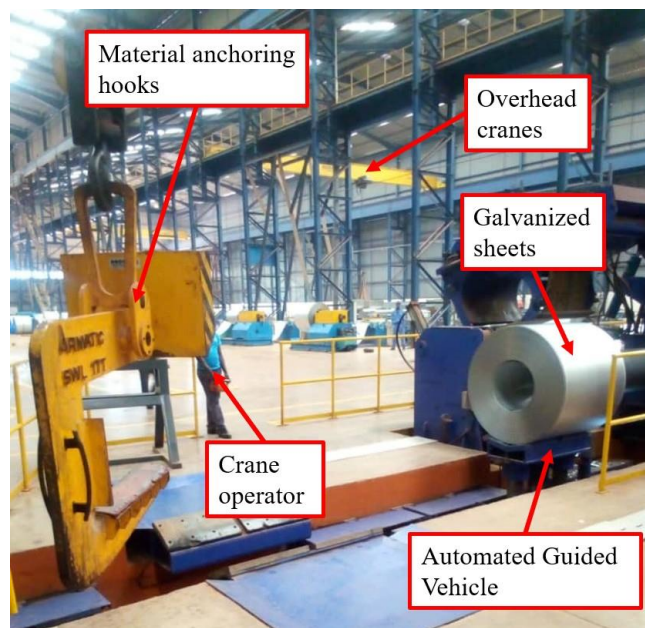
Automated material handling equipment types at steel manufacturing cell two
